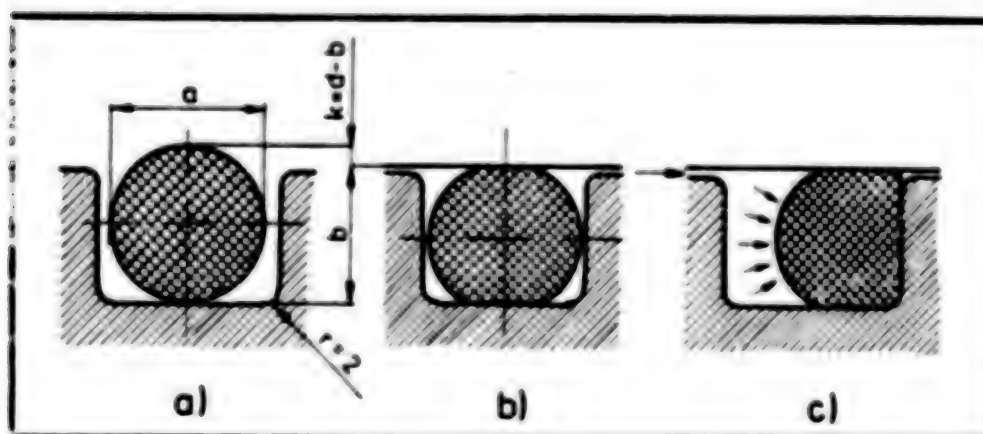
Operation of a rubber ring sealing the connection of the shaft with the sleeve: a - rubber ring in sleeve groove; b - clamping of the ring between the shaft and the sleeve in absence of pressure; c - clamping of the ring after pressure is fed.
